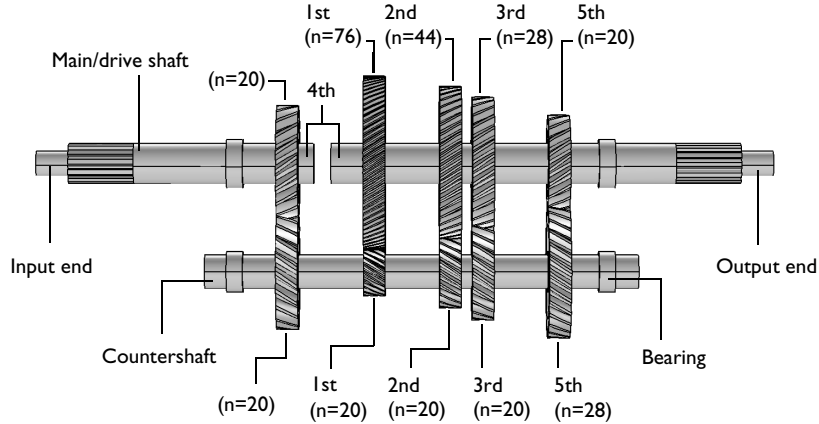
Gear arrangement in the 5-speed synchromesh gearbox. The synchronizing rings used to connect the gears with the main shaft are not physically modeled here.
